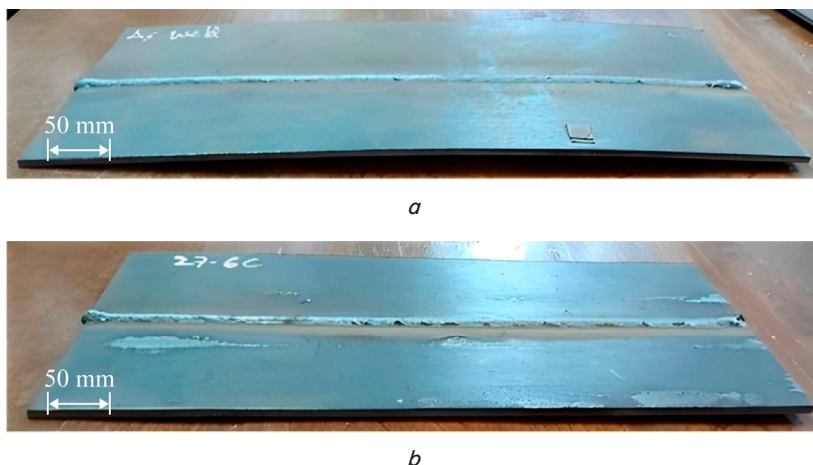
Welding specimens in: a – As-welded; b – HS27-6C
